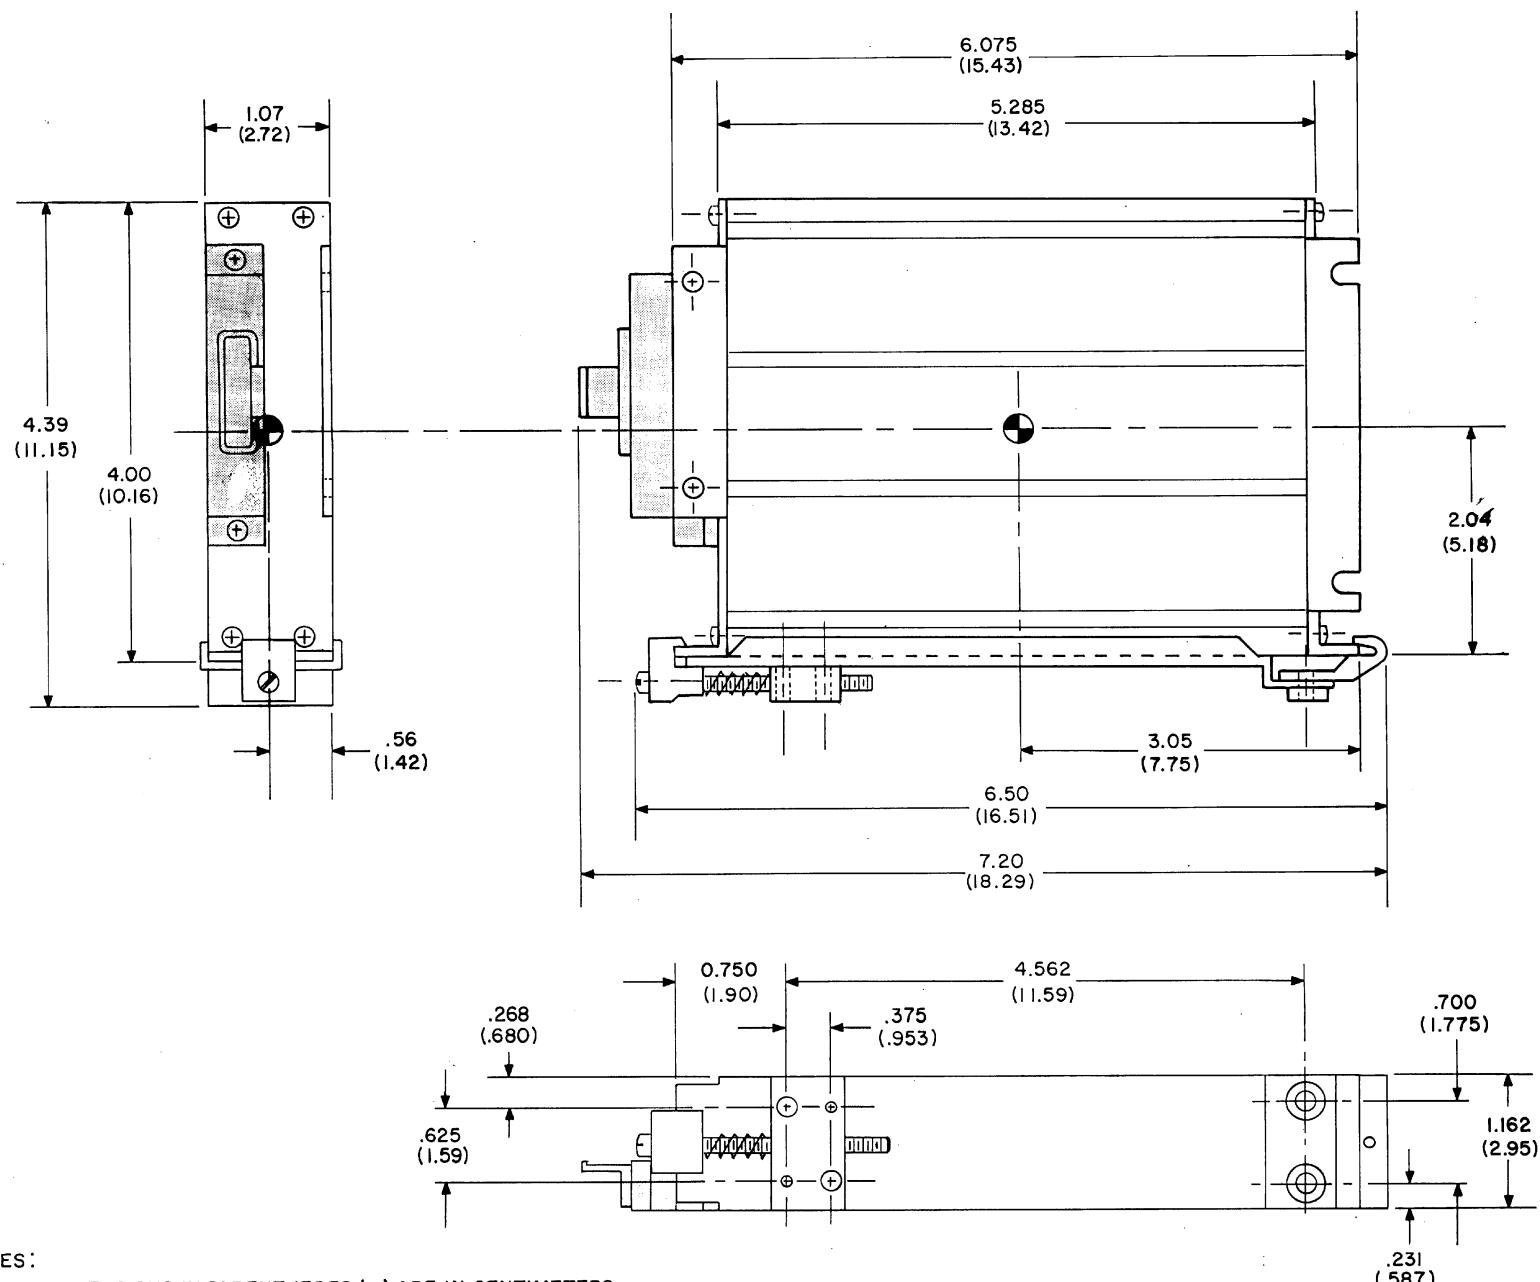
KS 270B/271B & KM 275 INSTALLATION DRAWING
